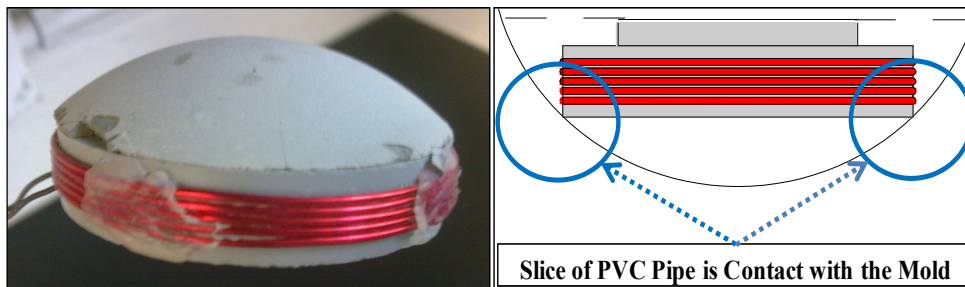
Case of circular cracks on the bottom of the cement paste housing.
